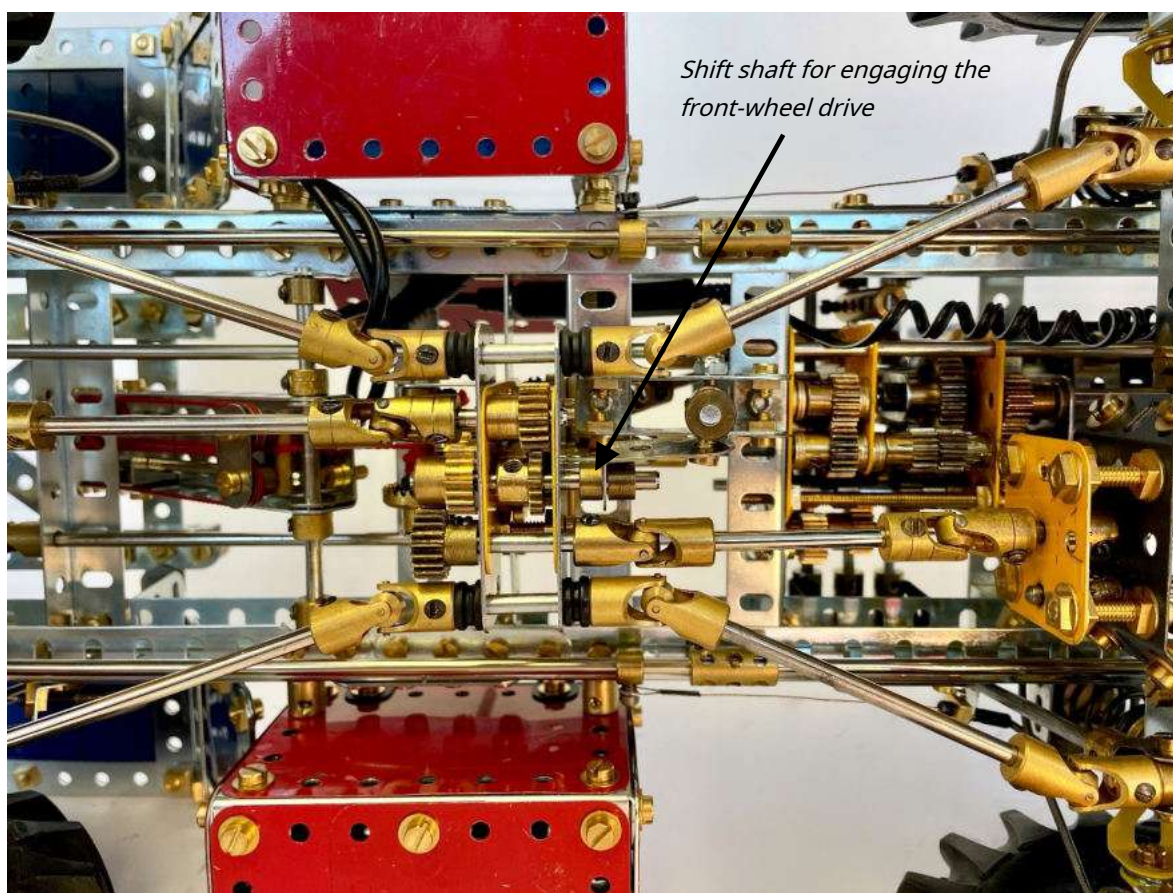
Intermediate gearbox from below, selector shaft for engaging the front-wheel drive
